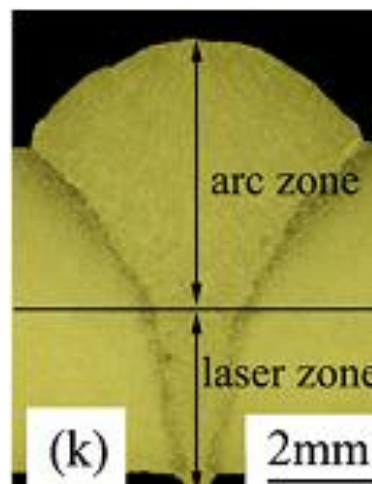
Typical shape of hybrid laser-GMAW weld [34].
